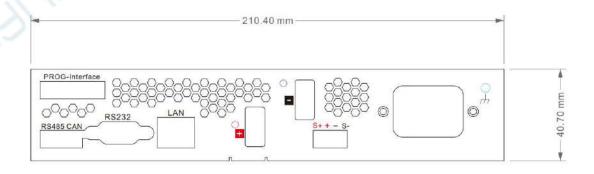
Rear Panel Dimension(mm) (Specification 50A and 25A)
